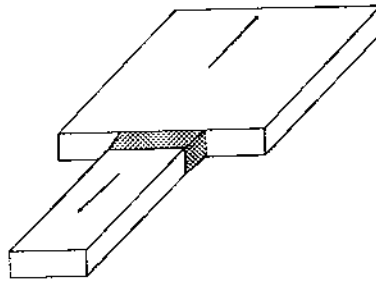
UKDEn Transverse Butt Weld 5
